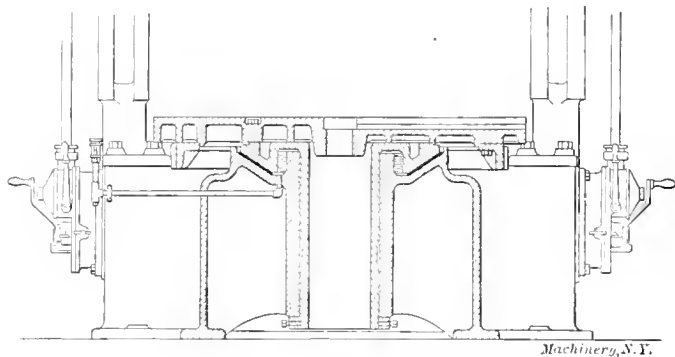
Special Annular Thrust Bearing Oiling Device.
